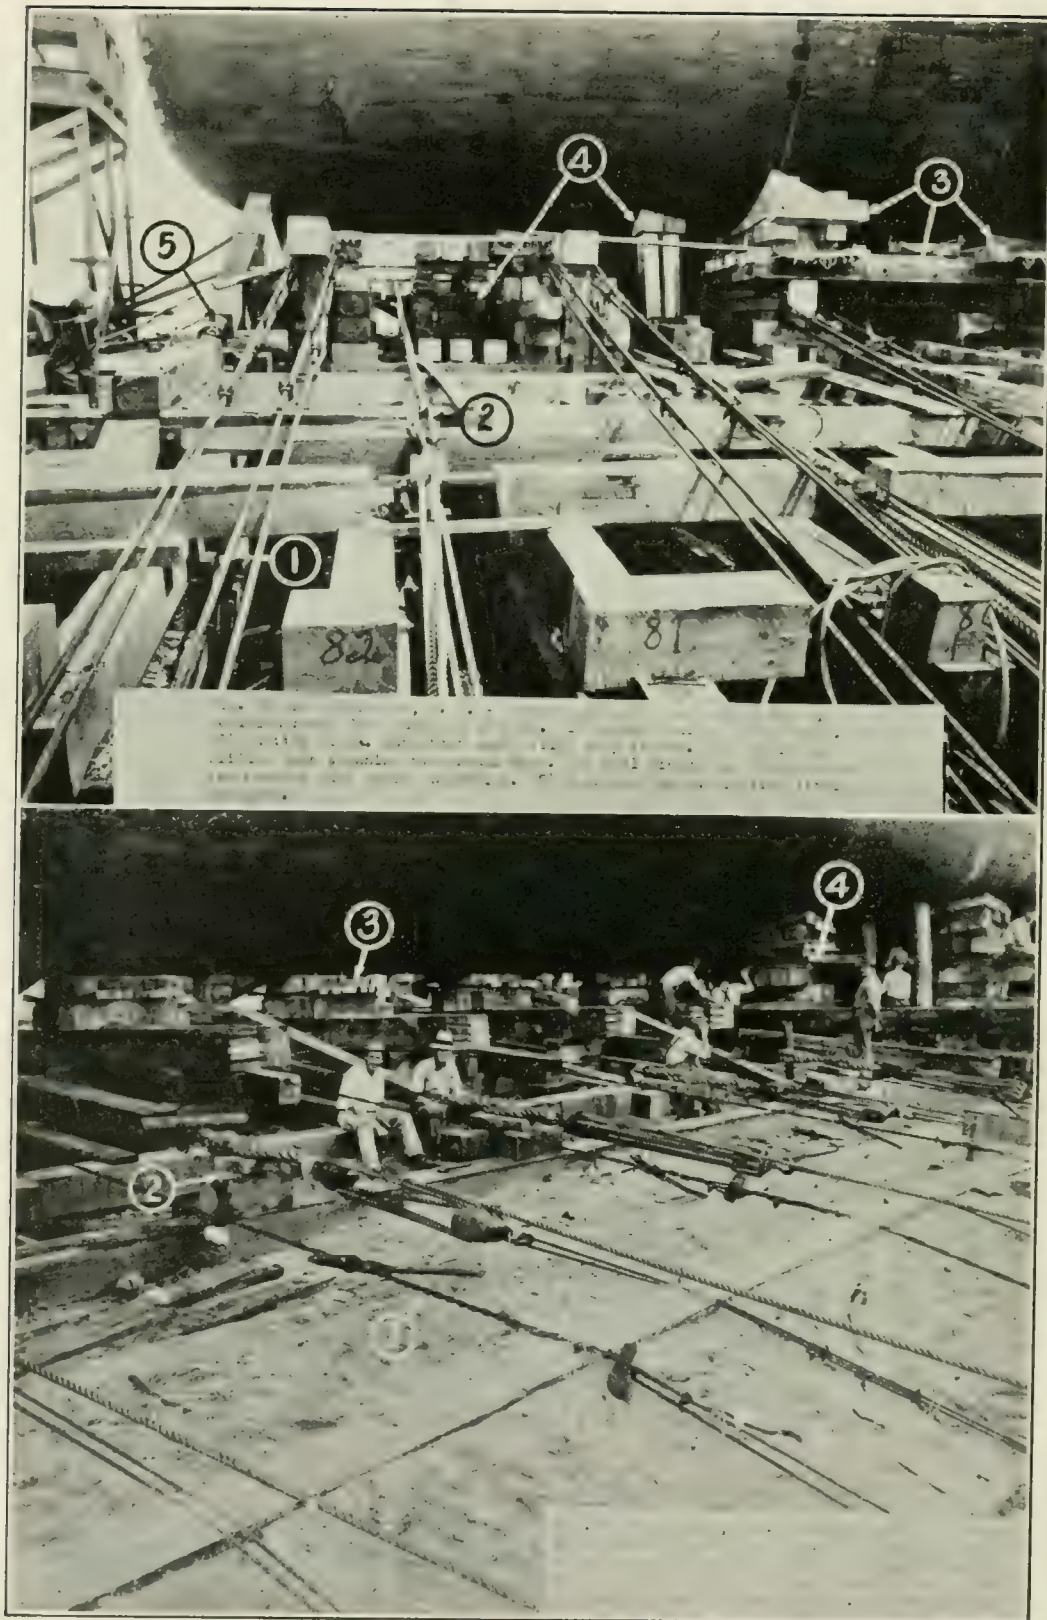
INBOARD VIEW OF LAUNCHING DETAILS.
